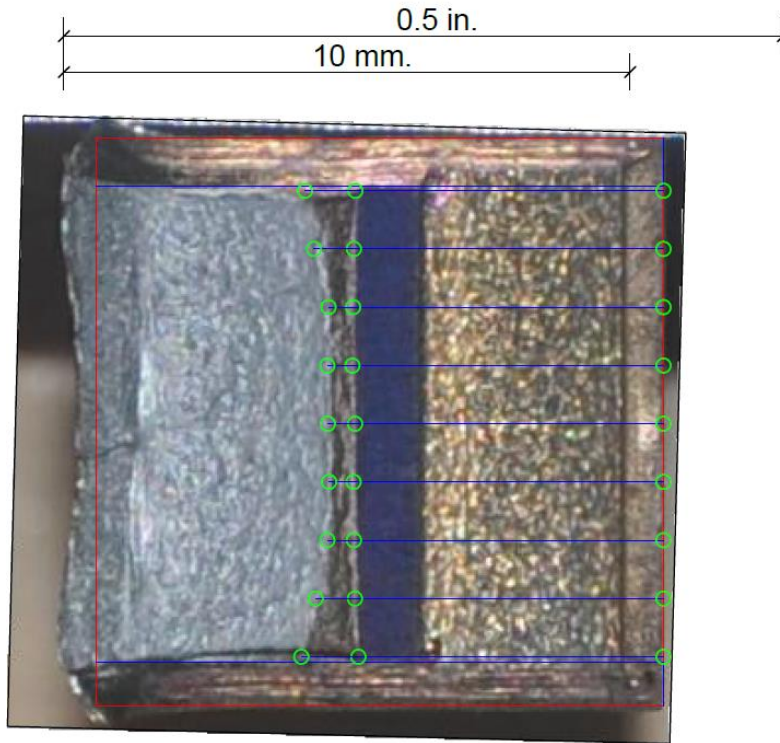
Specimen D5' Fracture Surface
